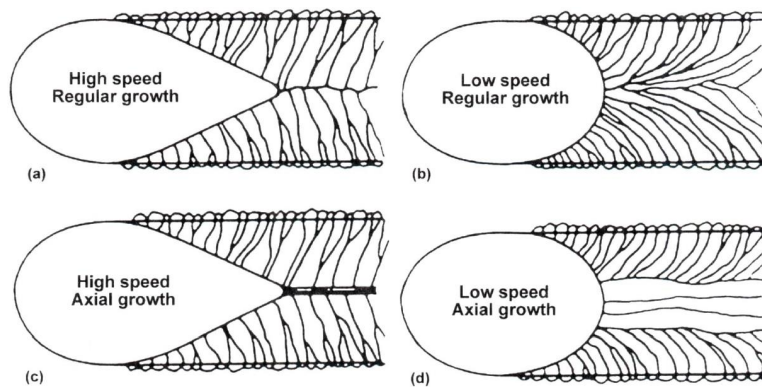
Grain morphologies that form from different weld pool shapes [26]
